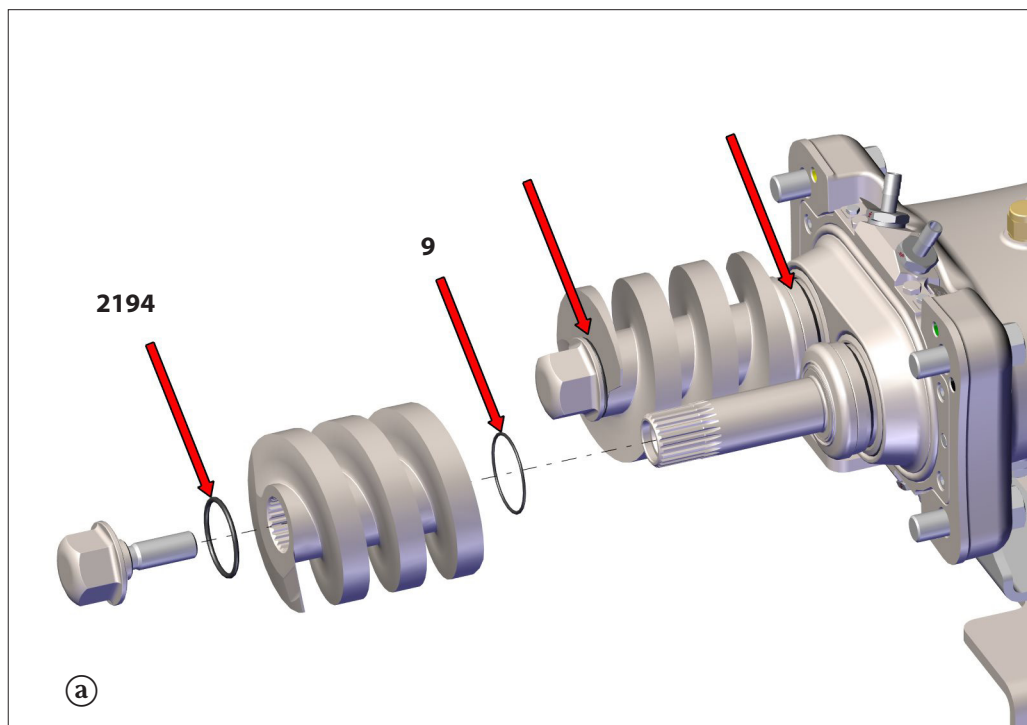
Cleaning special components: Failure of O-ring 2194 and O-ring 9 on the input and output spindles
